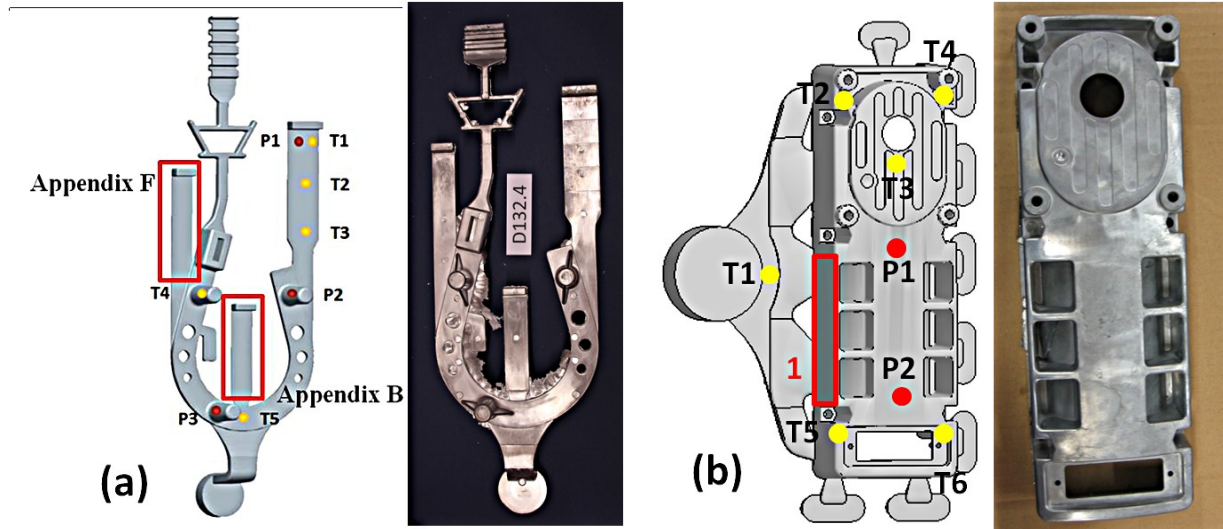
(a) Horse-shoe shaped Reference Casting, (b) Gear Box Housing with indicated the positions of the sensors and of the test samples.
